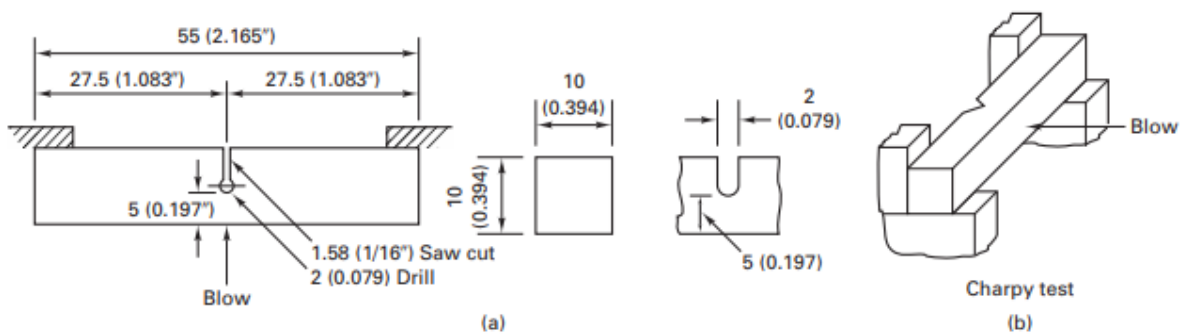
(a) Standard Charpy impact specimens. Illustrated are keyhole and U notches; dimensions are in millimeters with inches in parentheses. (b) Standard V-notch specimen showing the three-point bending type of impact loading.
